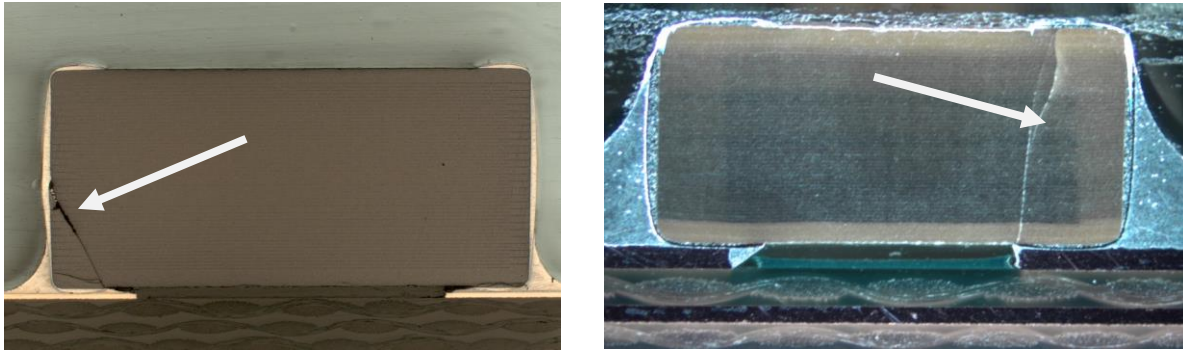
Cross Sections Depicting Cracks Due to Mechanical Stress
